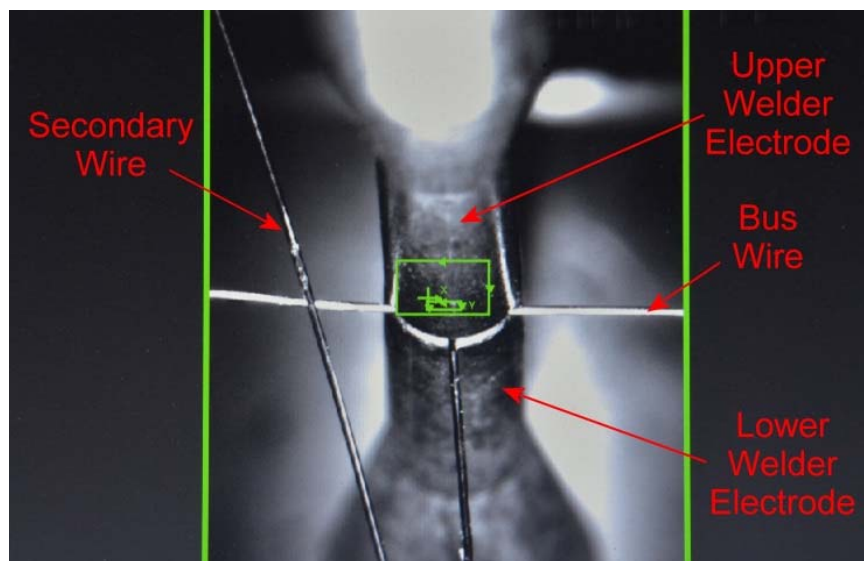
Vision system screen with the welder electrodes together performing a weld operation
